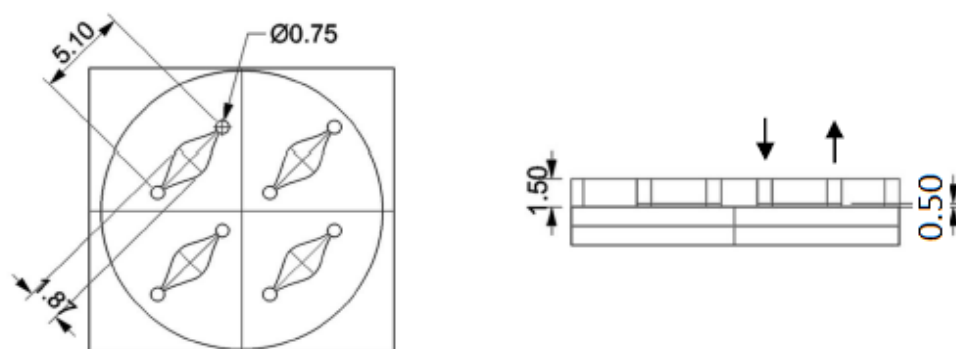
Schematic top view and cross section of the cover mould. Dimensions are expressed in millimetres [50]
